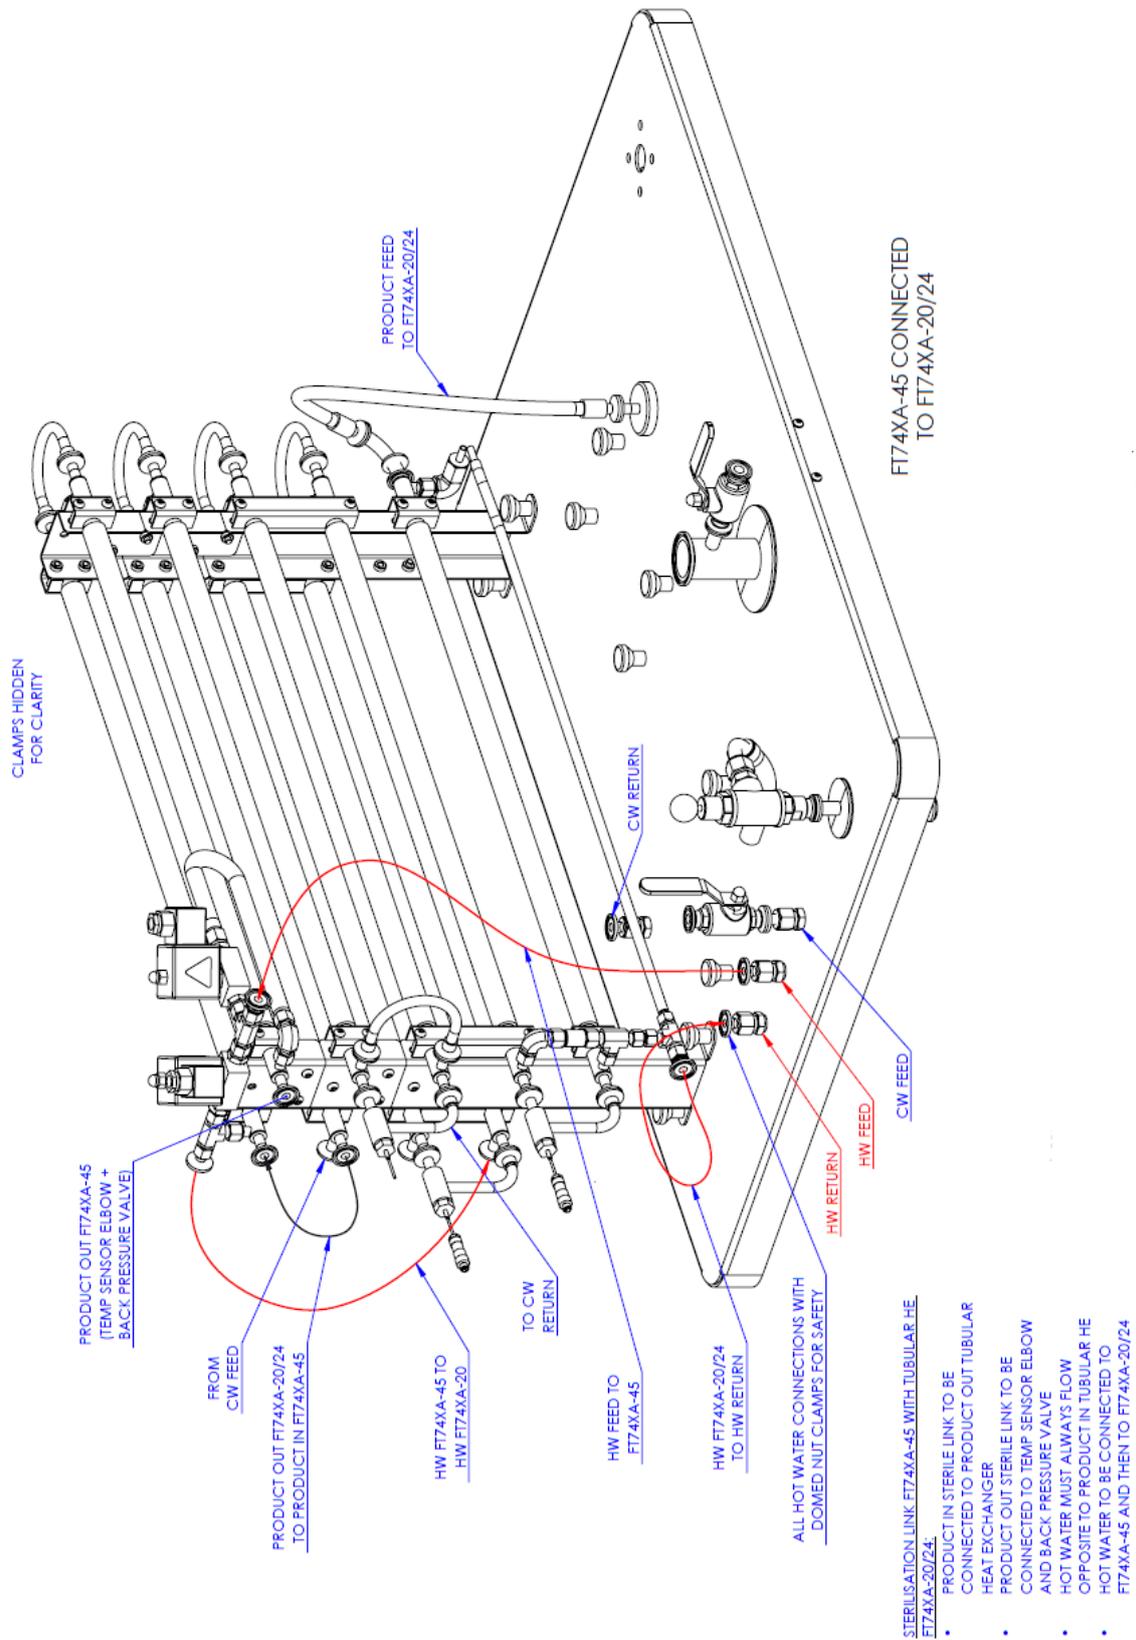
Connections between FT74XA-45 sterilisation link and the tubular heat exchanger
